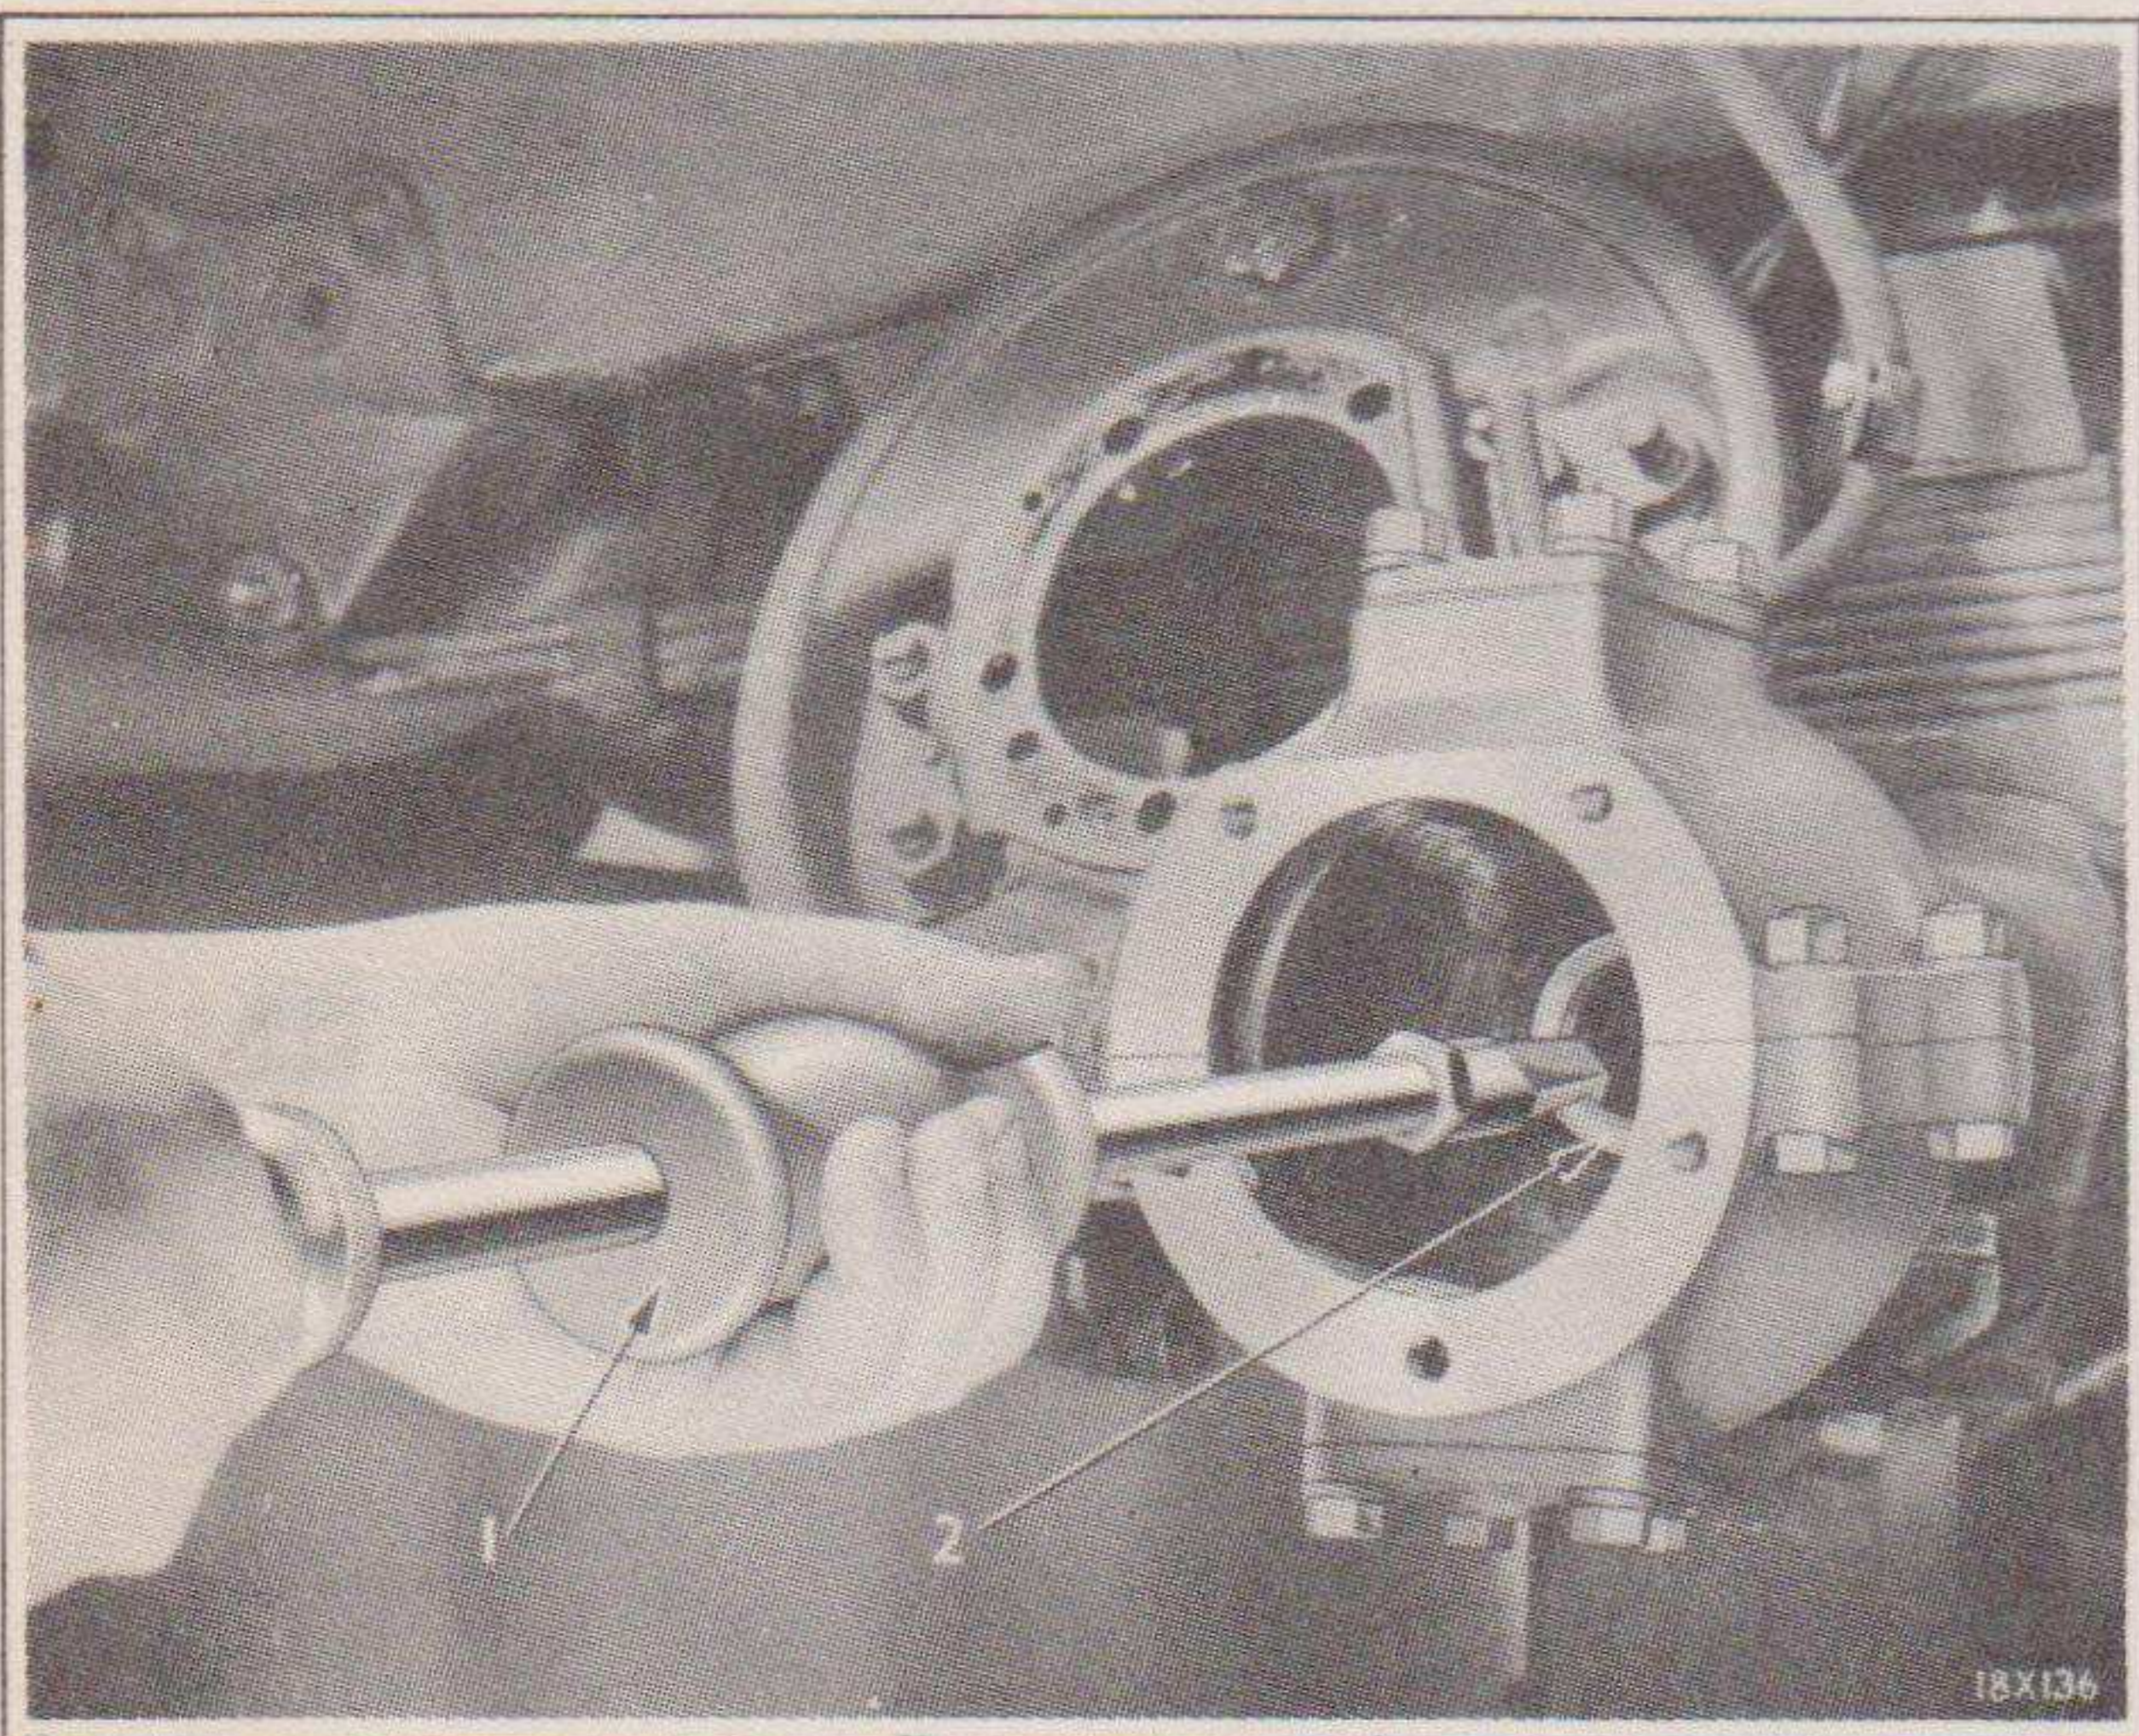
Removing Universal Drive Shaft Oil Seal
